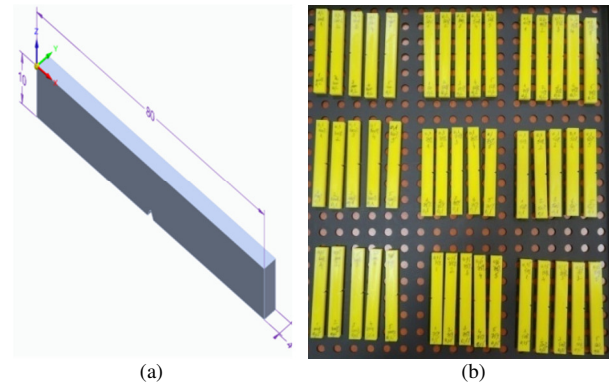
The samples used for experiments: (a) dimensions, (b) actual samples subjected to annealing.
